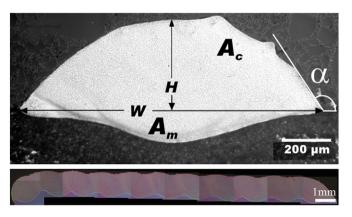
Transversal cross-section of single laser track (top) and tool steel laser clad coating formed by 33% overlap (bottom) [2,3].
